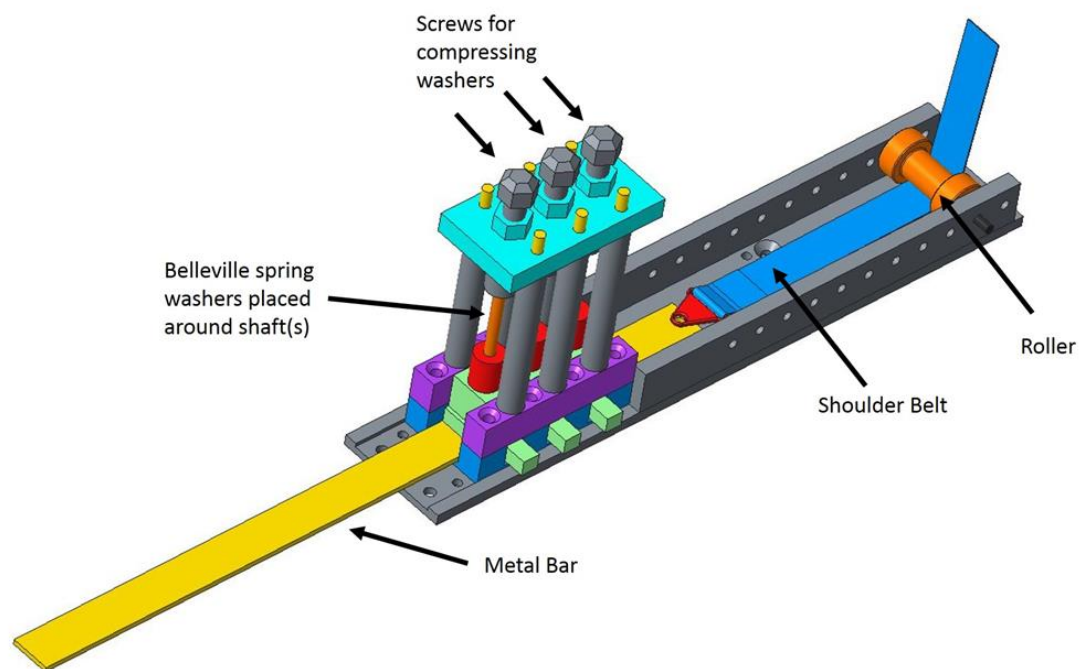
Schematic of a custom load-limiter system with shoulder belt attached to a metal bar. Three pistons compress a block of aluminum onto brake pad material welded to the metal bar. This exerts a frictional force on the brake pad, which acts as a load limiter to the shoulder belt.
